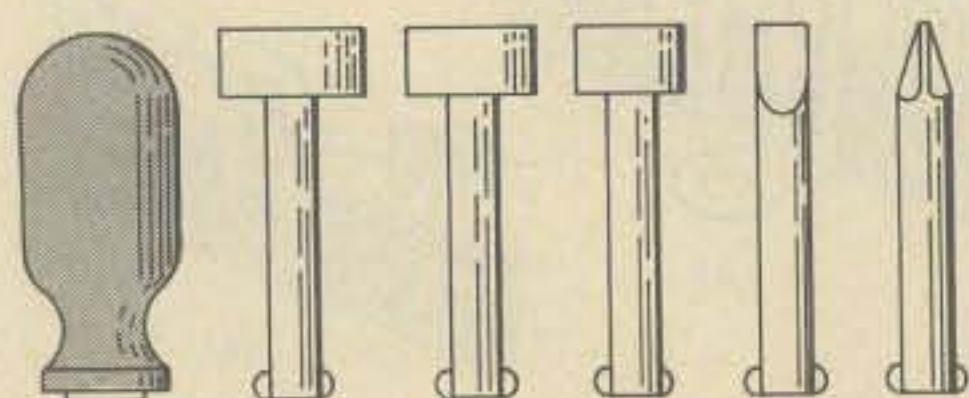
Handle with special socket can take a series of socket wrenches and screwdrivers.
